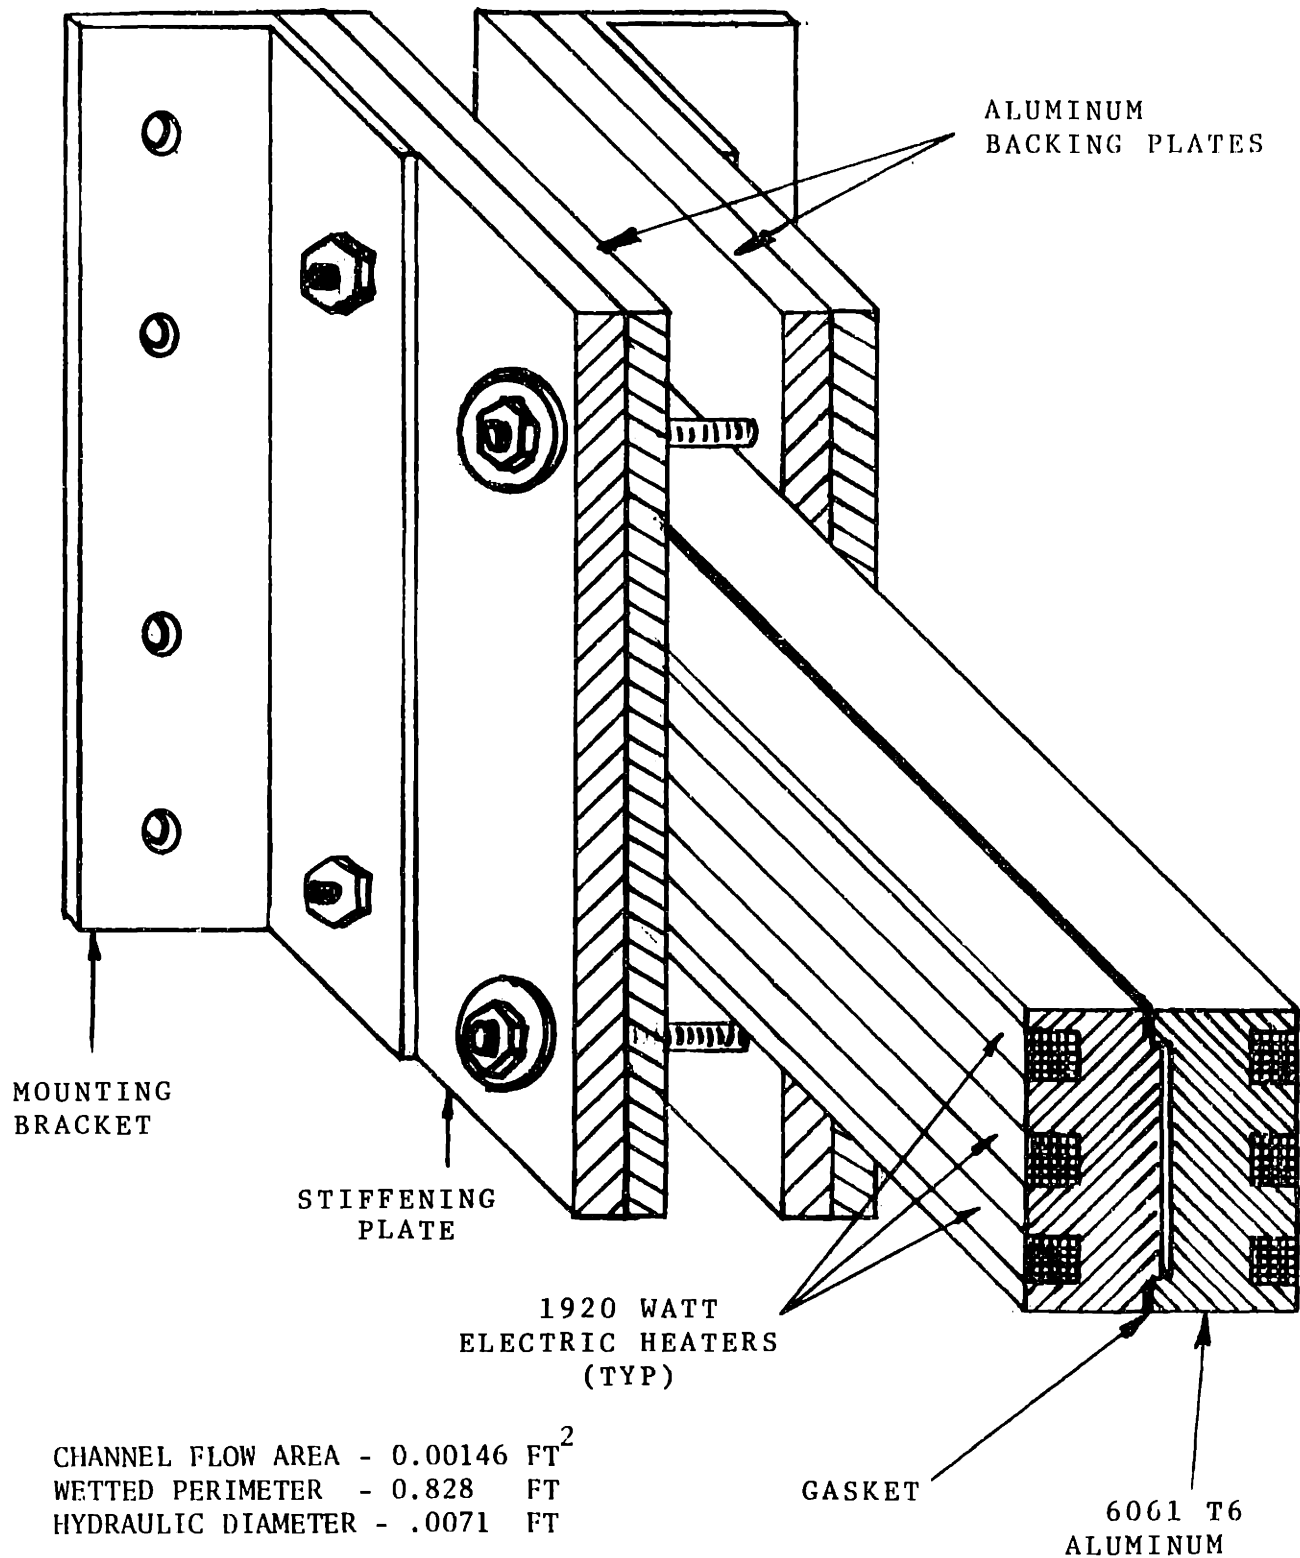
CROSS SECTIONAL VIEW OF NEW TEST SECTION
